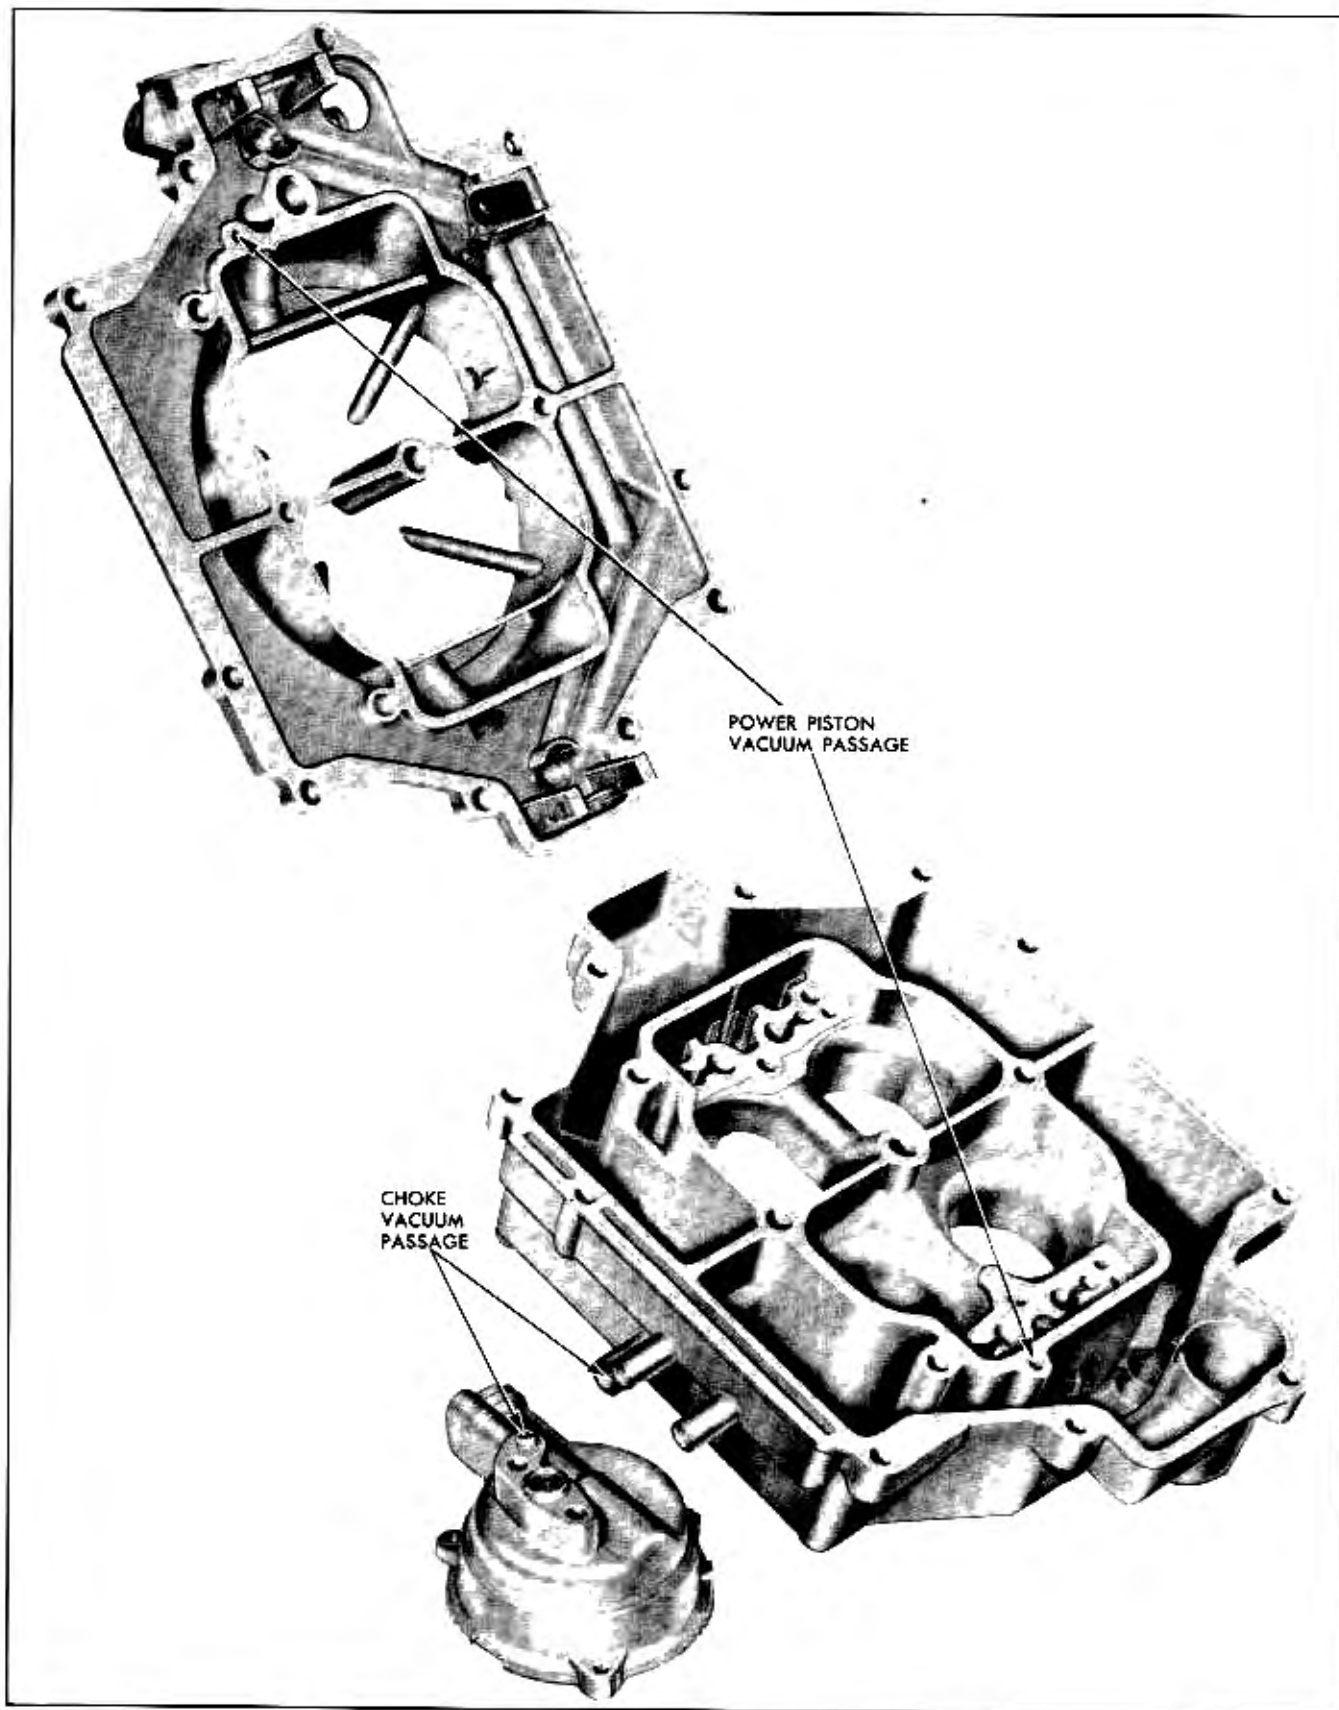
B-50 Passage Identification—Body—Air Horn—Choke Housing
